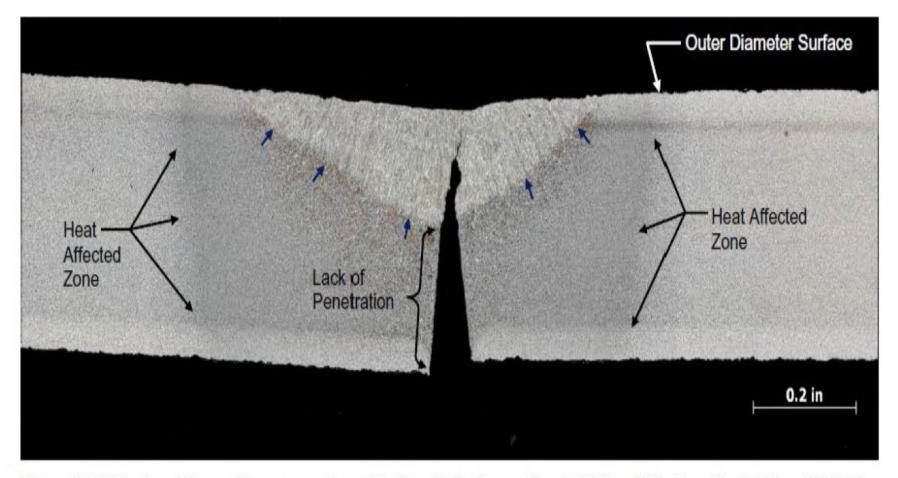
Etched metallographic cross section of the longitudinal seam in pup 3 taken 10 inch north of girth weld C3. The microstructure of the weld was consistent with a fusion welding process along the outer diameter surface of the seam.
